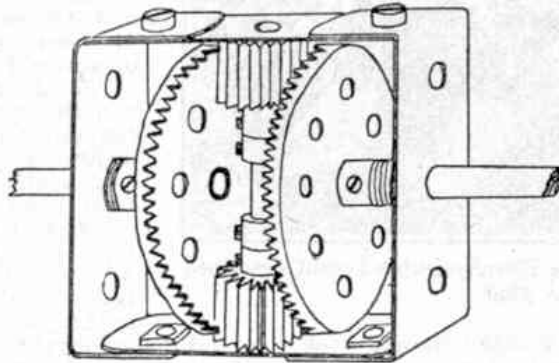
Differential mechanism. An arrangement suggested by Mr. R. J. Shephard, Old Colwyn.
